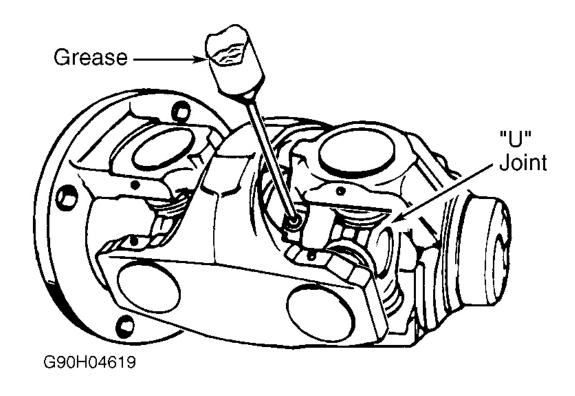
Lubricating Ball Socket Of Double Cardan Joint Courtesy of GENERAL MOTORS CORP.
